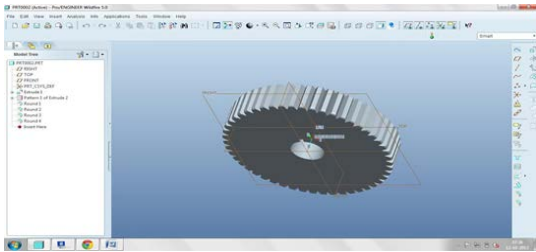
CAD 3D MODEL OF GEAR USING PRO E
